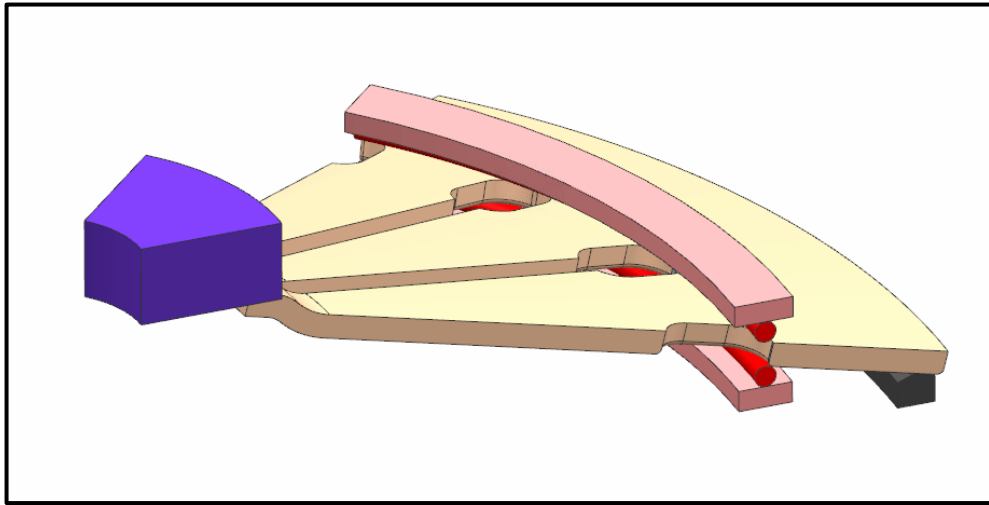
The simple model of pushed-type clutch cover assembly mechanism.
